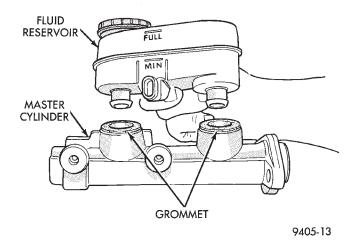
Removing Fluid Reservoir From Master Cylinder
